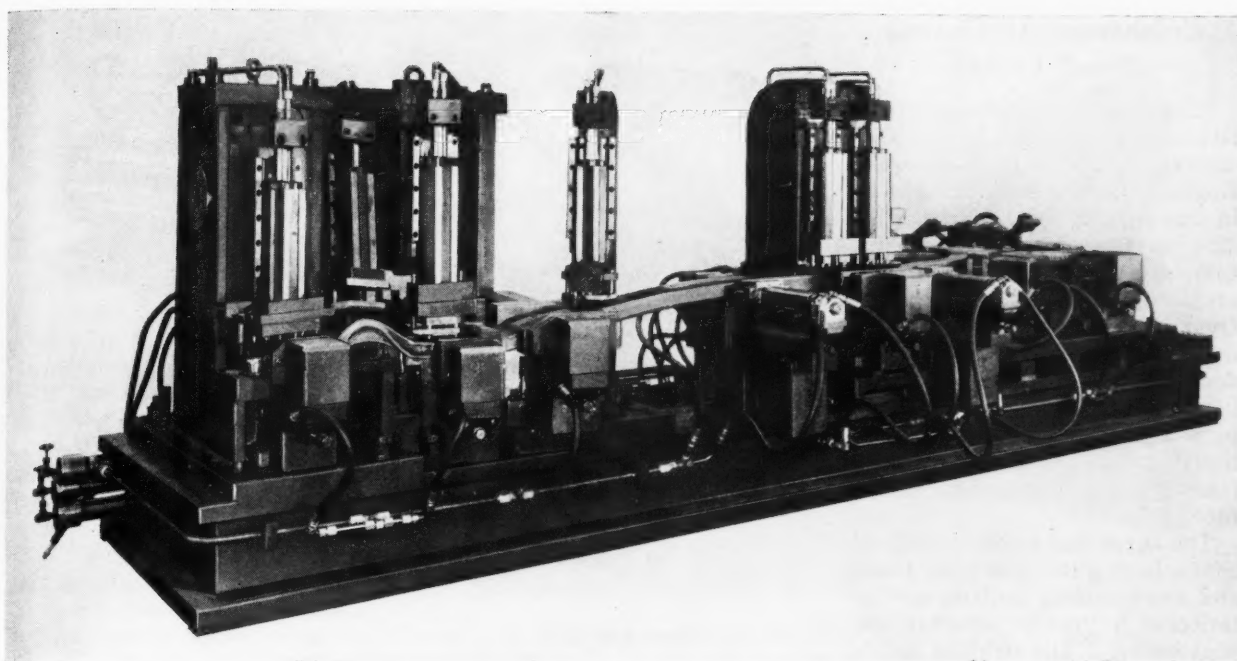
Danly hydraulic machine for piercing holes in flanges and web of automotive frame side bars
